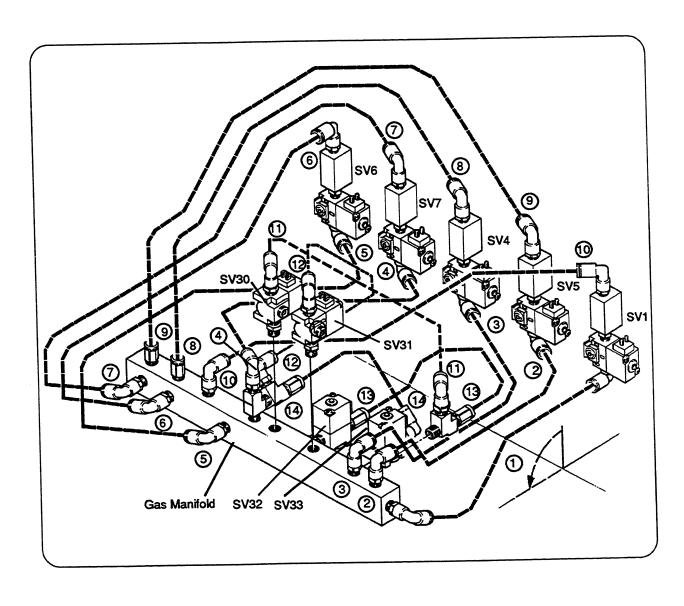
Gas Console Manifold and Solenoid Valve Hose Connections
